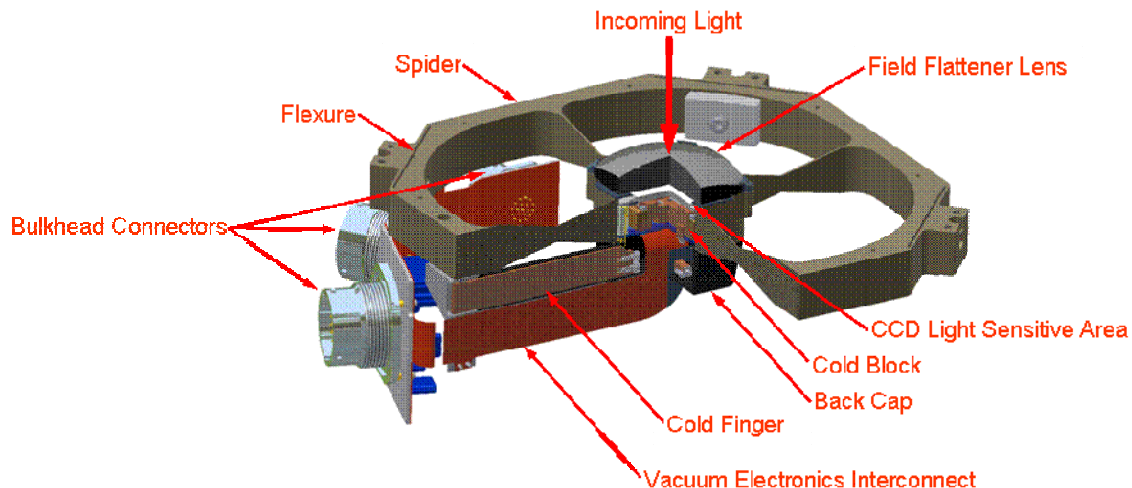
Cutaway close up view of the spider assembly. Flexures incorporated into the spider decouple the expansion of the aluminum cryostat housing from the stainless steel spider.
